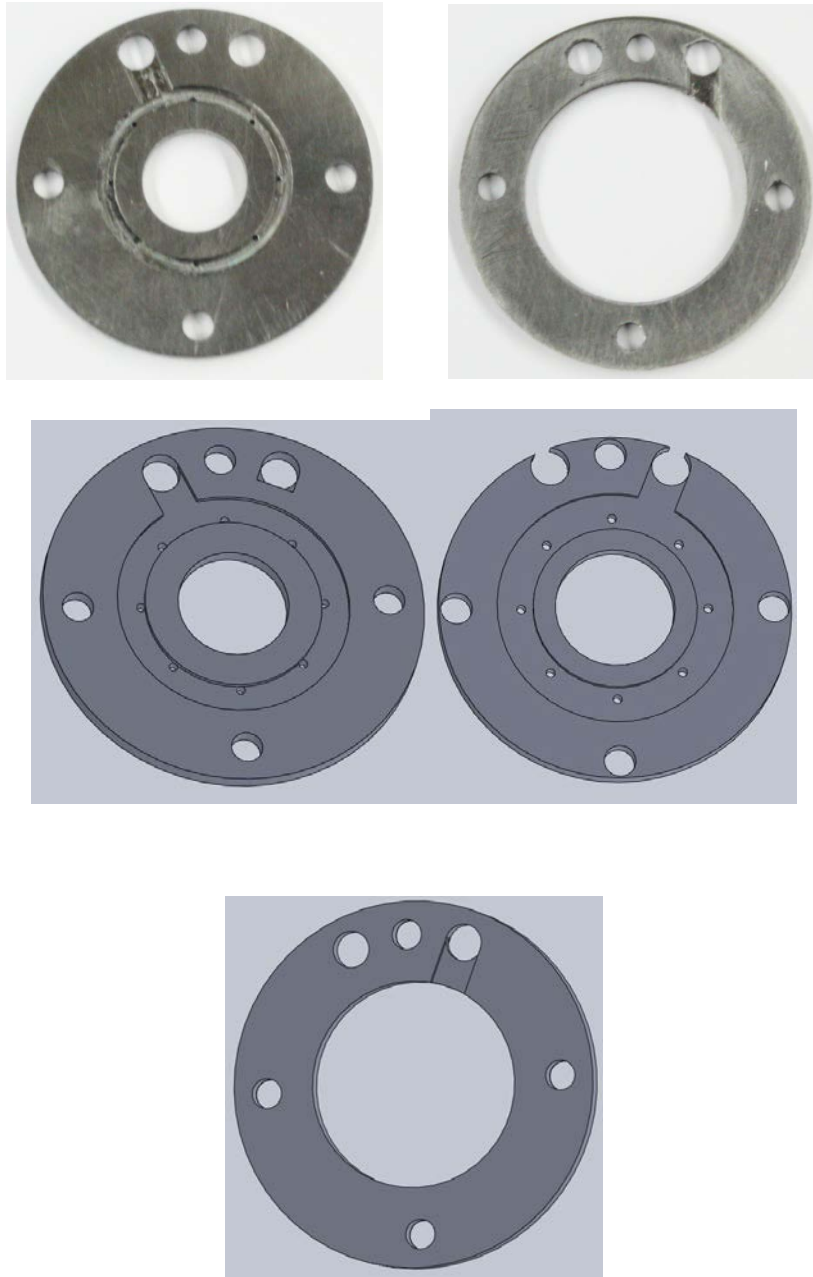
Photo of front, rear & spacer air thrust bearing and the thrust spacer.
